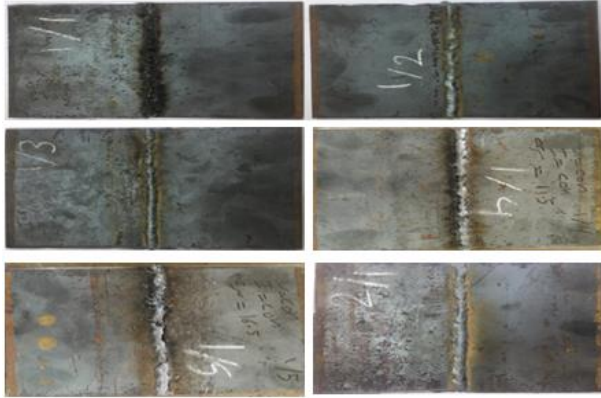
Carbon steel plate welded with 100 Amp, 18 V, 10 l/min CO₂ and different wire welding speed from 1.5 to 16.5 m/min
